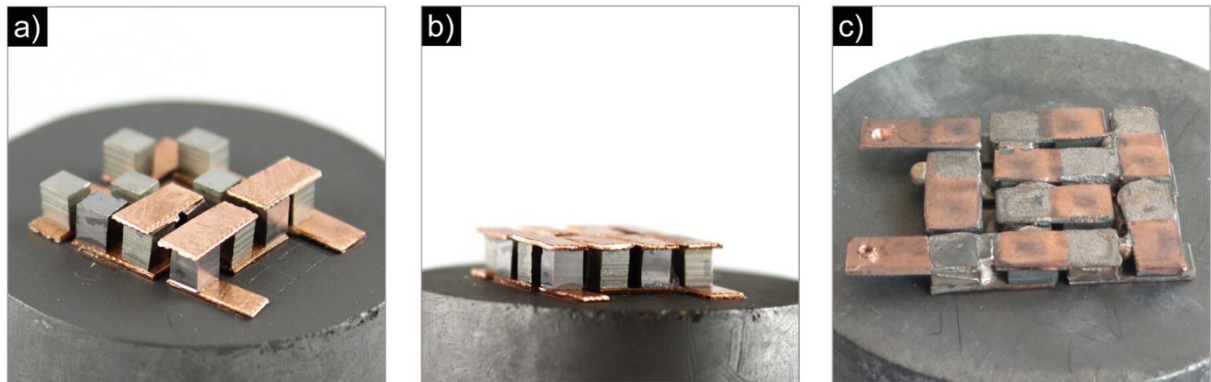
a) Half-Heusler module assembly with Cu contacts, b) fully assembled modules with Cu contacts, c) Half-Heusler module after brazing in the spark plasma sintering furnace.
